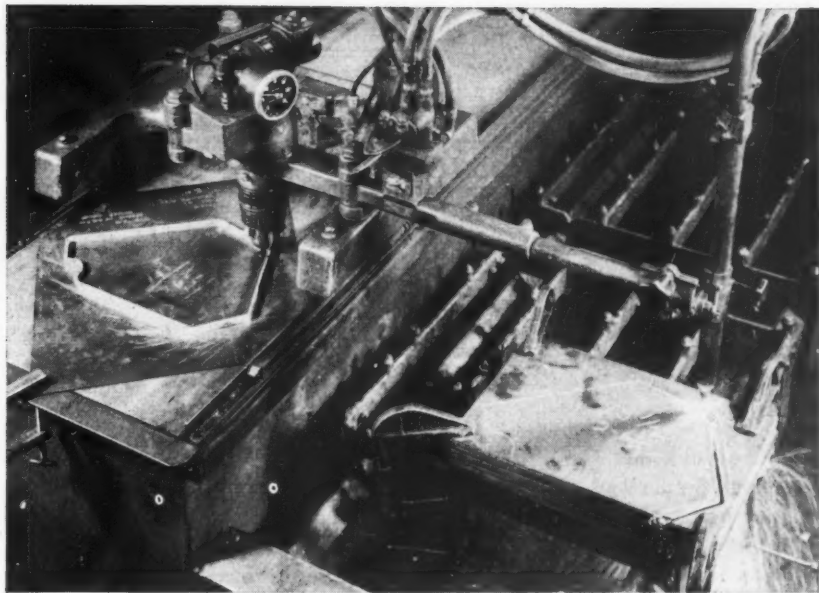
Left—An Oxweld CM-21 cutting machine with a blowpipe capable of cutting material 60 inches in thickness
